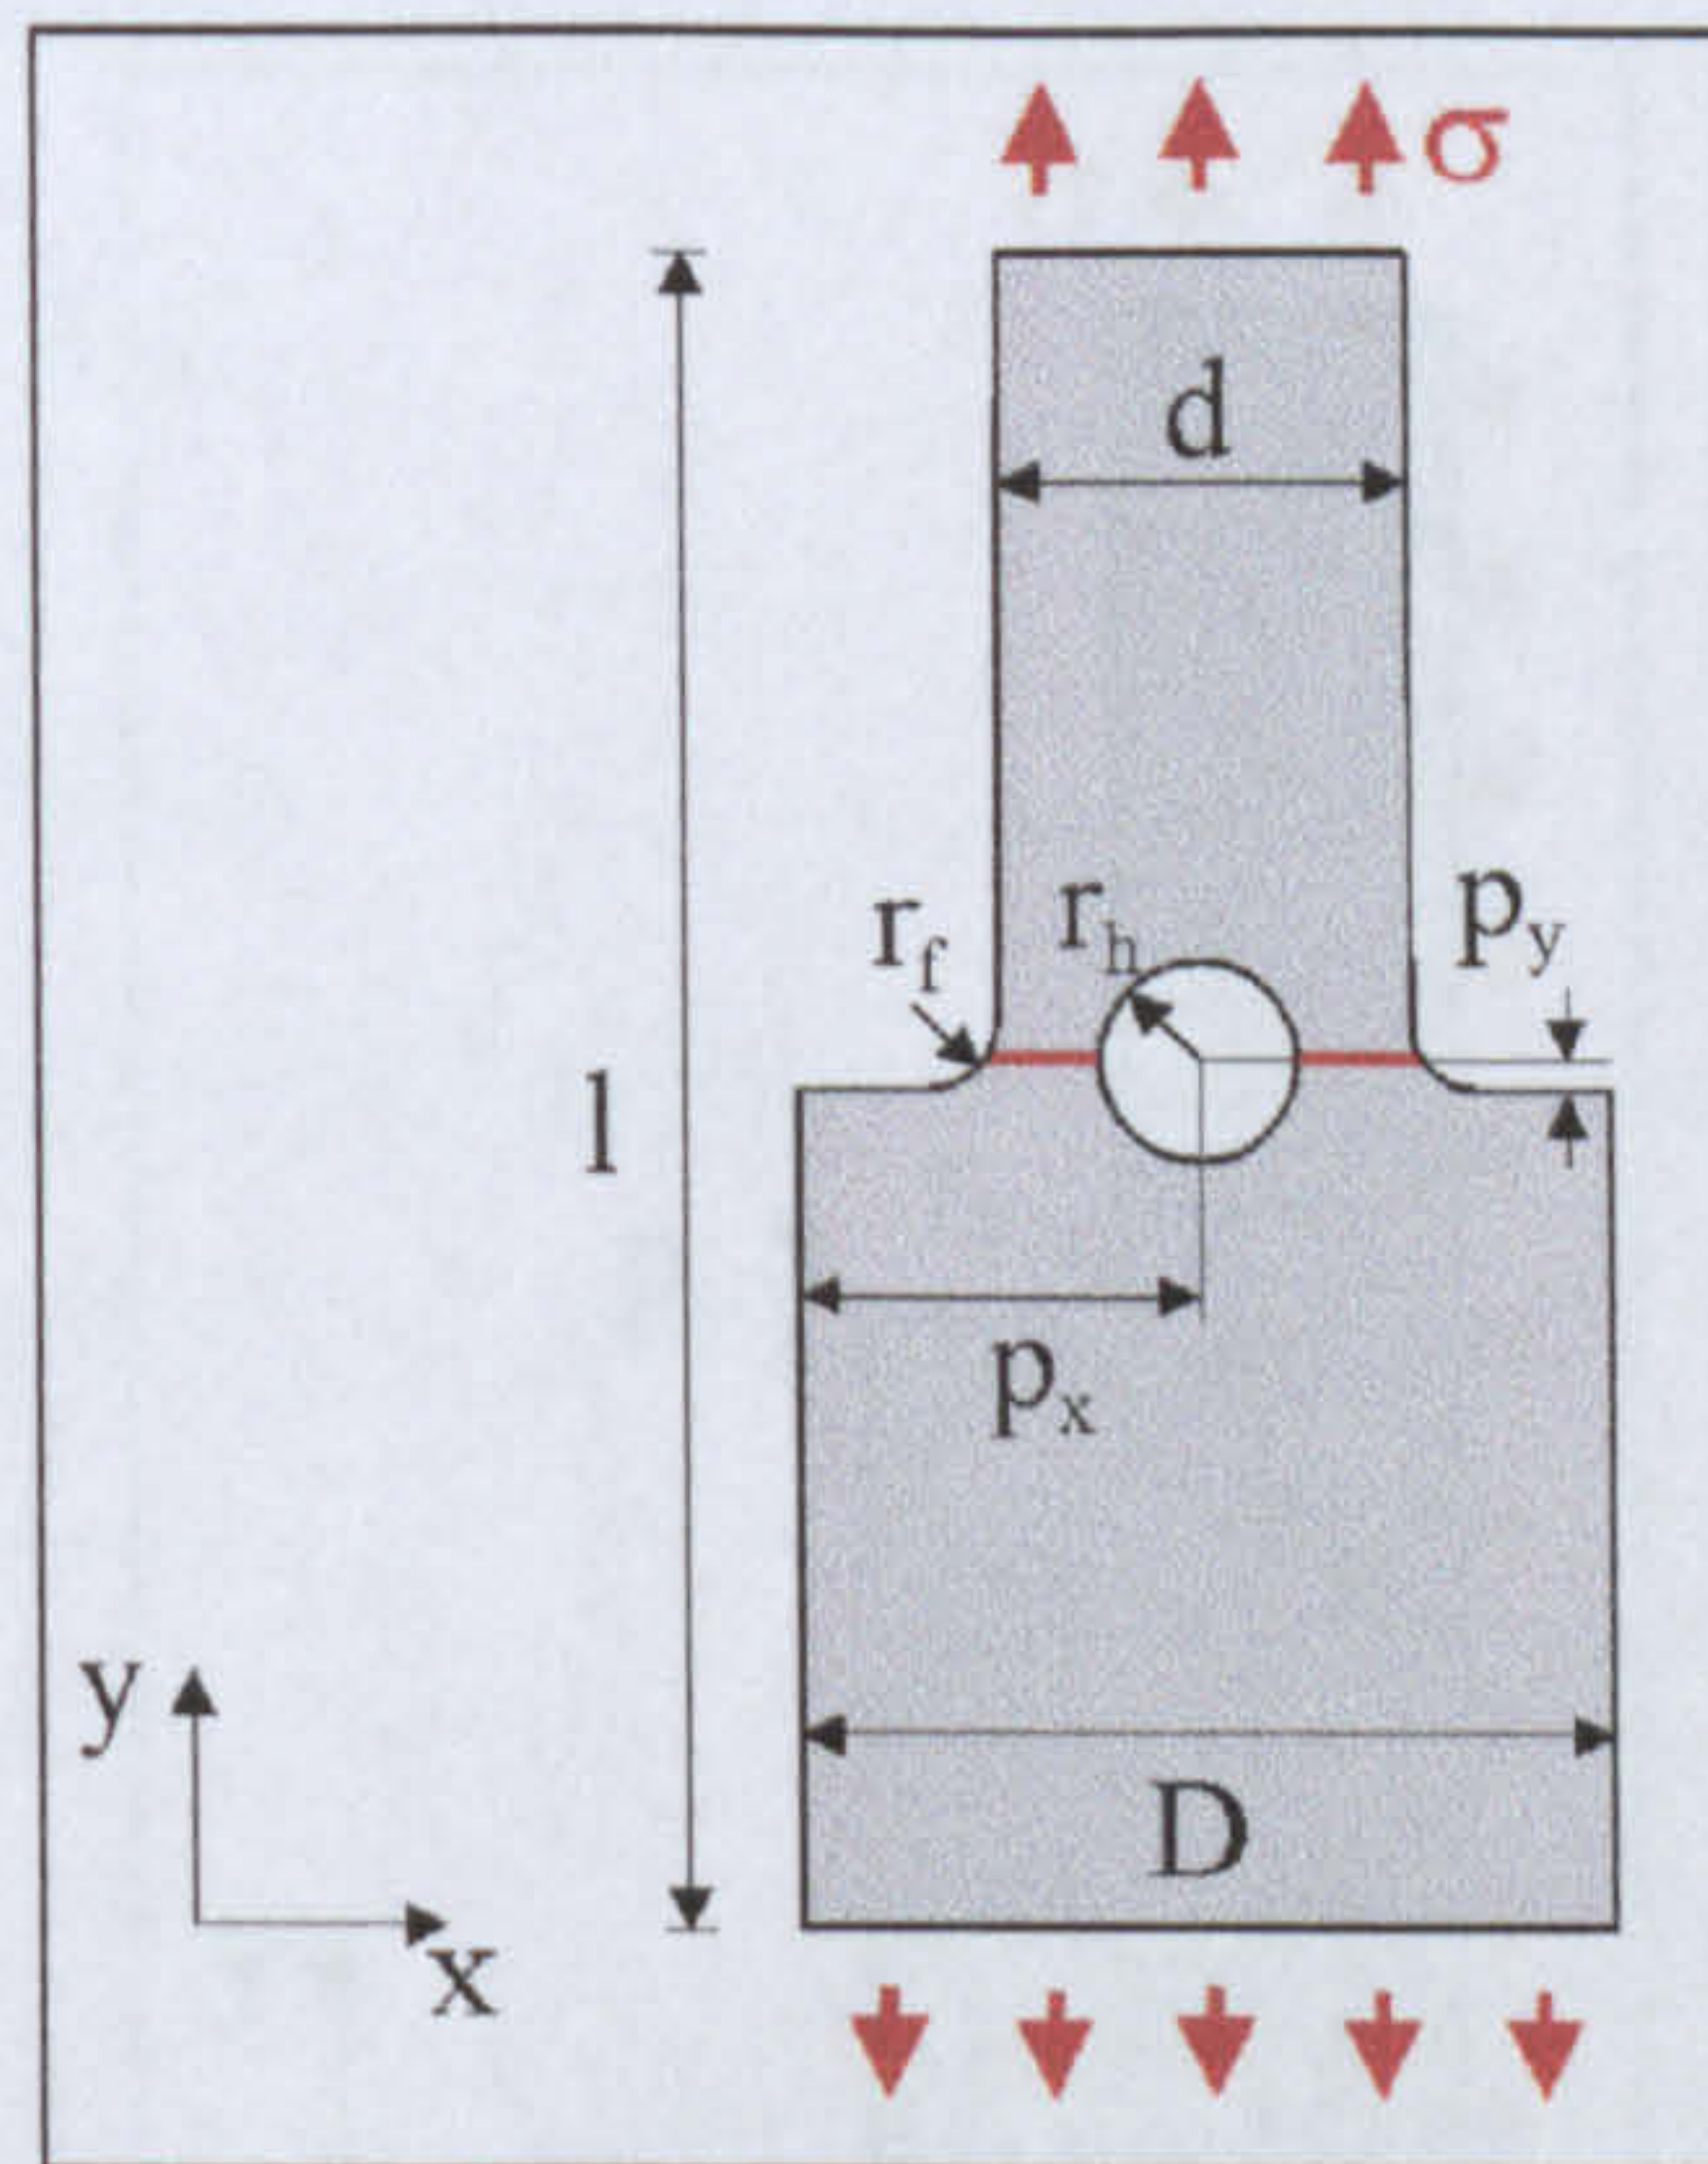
The geometric problem of a hole placed between shoulder fillets
